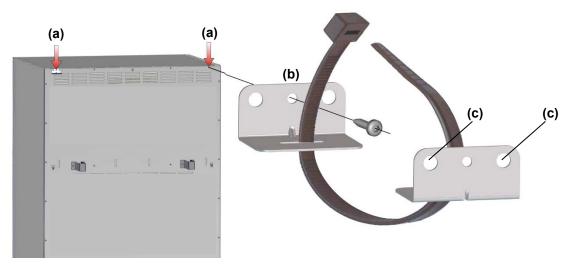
Rear chamber (KB 470) and mounting the flexible tilt protection kit
